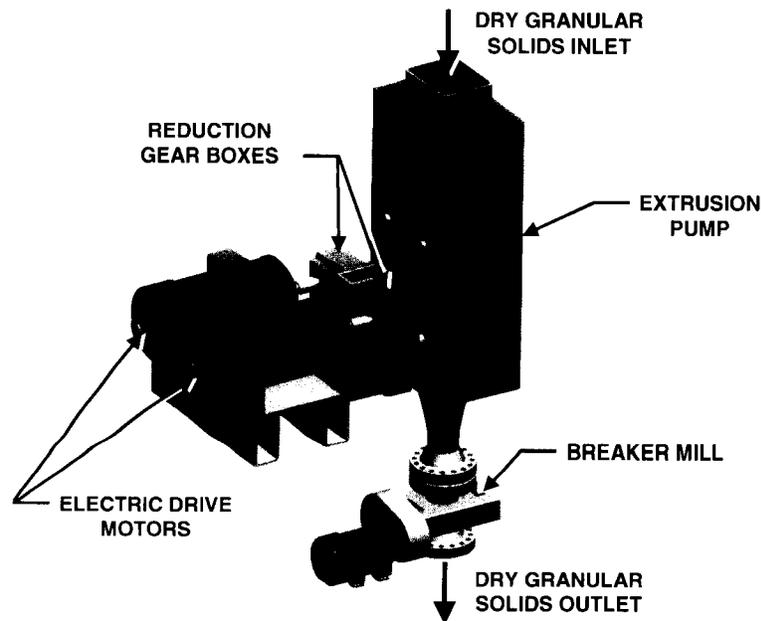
Tractor-Mill Linear Dry Solids Extrusion Pump Layout
